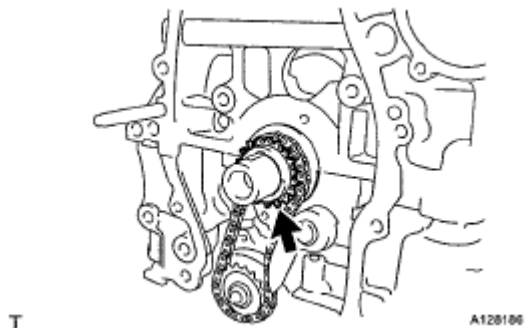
Locating Crankshaft Timing Gear And Sprocket
